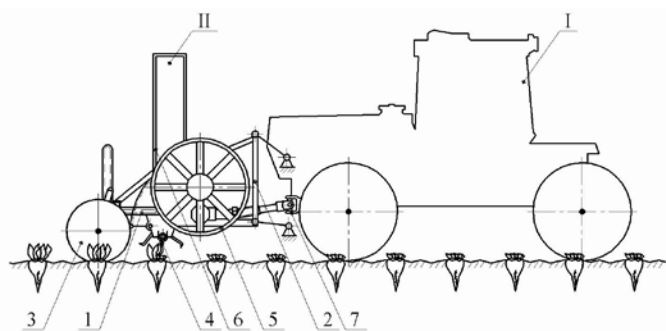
A design and technological scheme of the haulm topping machine frontally mounted on a wheeled tractor:
